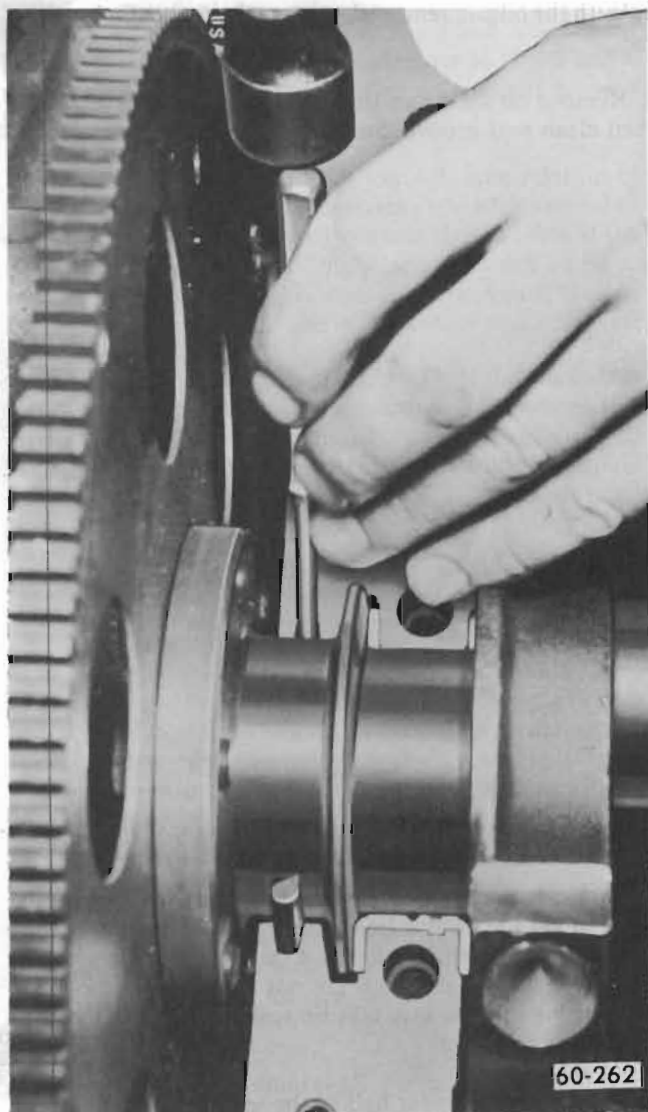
Removing Rear Main Oil Seal (Upper)
